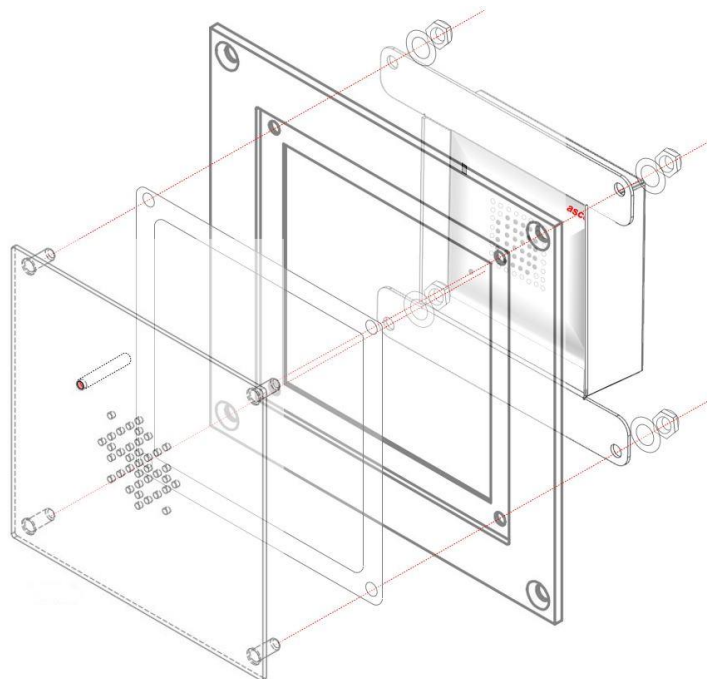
Assembling the Speech Module device panel, device panel gasket, front panel and device frame with Speech Module
